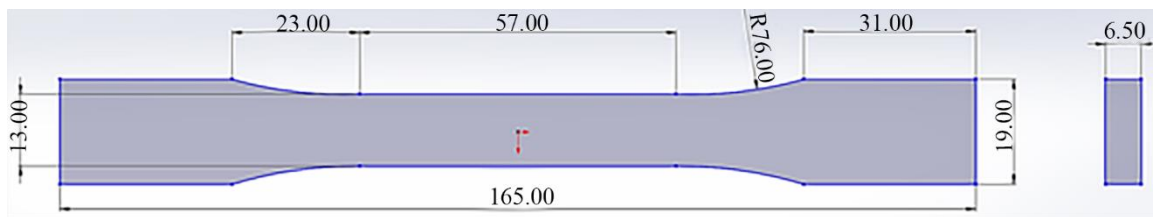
Dimensions of the Tensile Test Specimen in mm.
